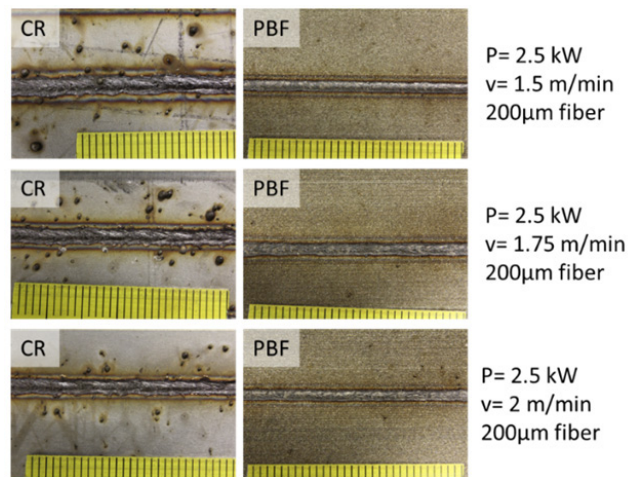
Spattering on CR316L welds. No similar effect on PBF welds.
